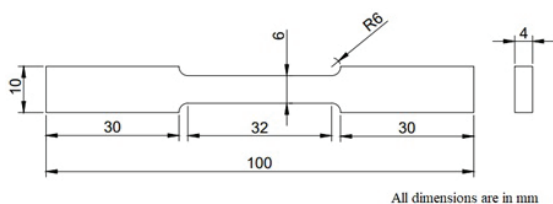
Schematic of Tensile specimen dimensions as per ASTM - E8 standard [25]
